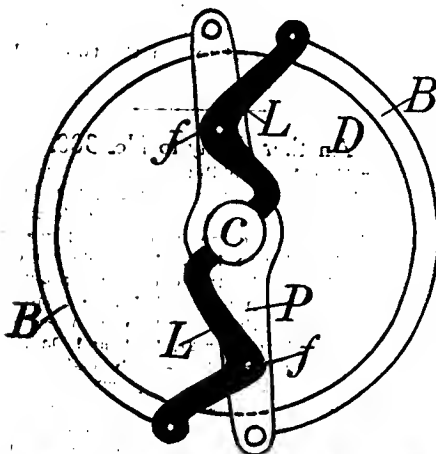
DRAWING SHOWING MECHANISM OF MORS CLUTCH.
